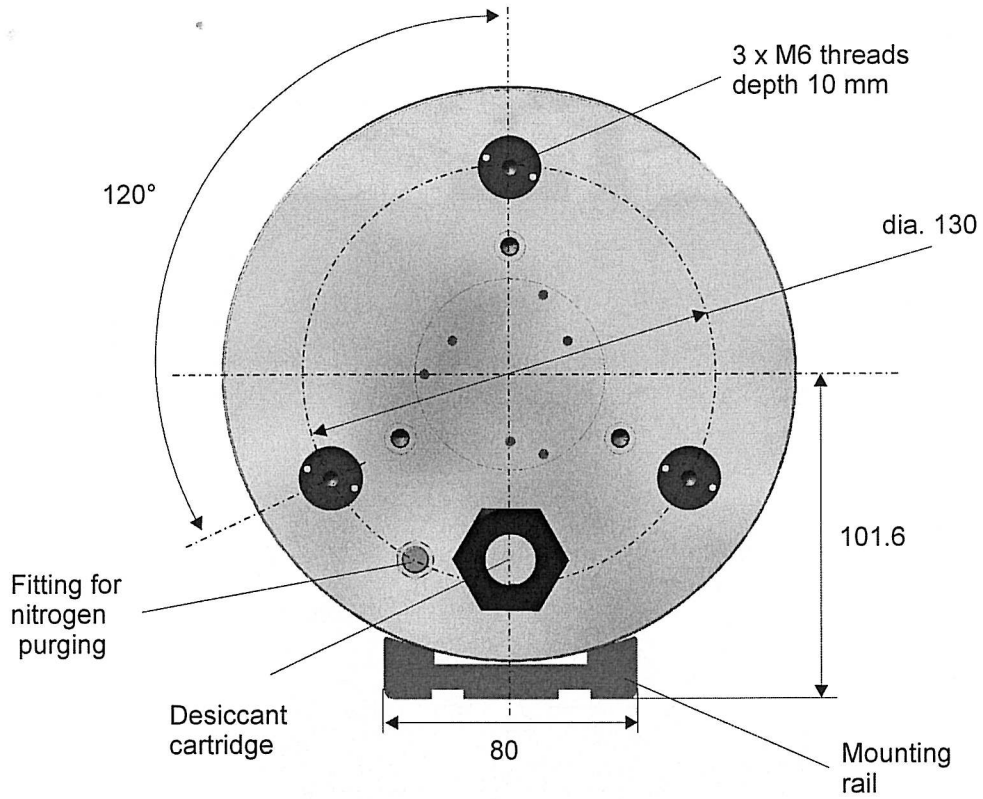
Front view of LMS-Q240i (front plate side), all dimensions in mm
